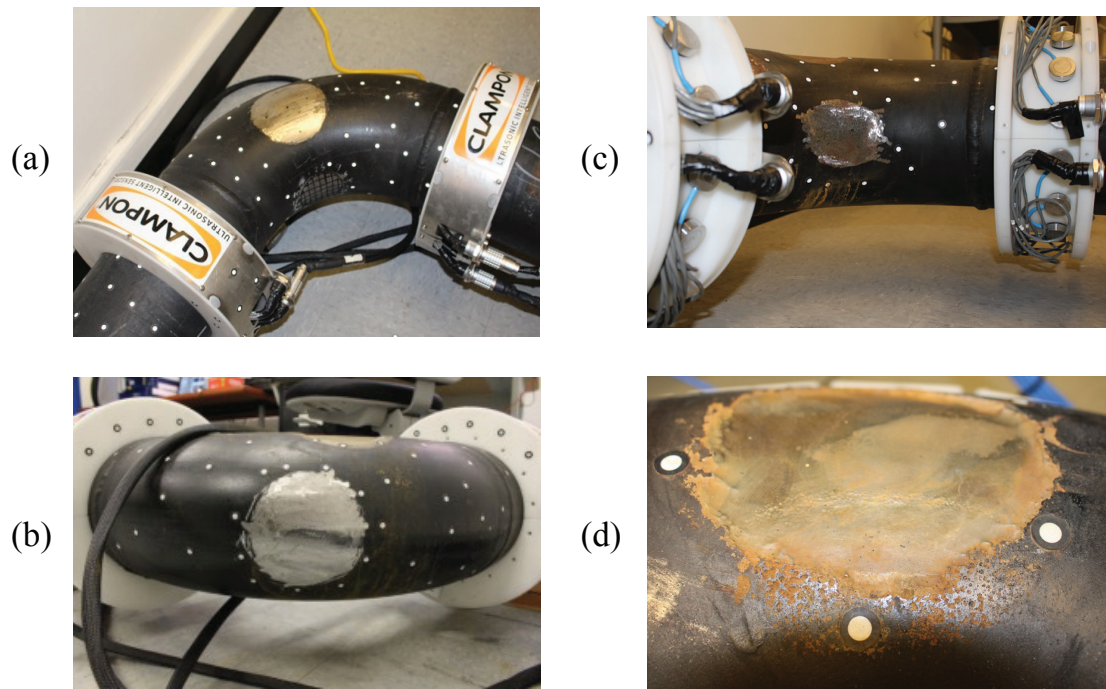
Photographs of the three defects considered in the experimental study. (a) Overview of pipe orientation and Defects I and II (b); Defect III, introduced via angle grinder, located on the extrados; (c) Defect I, introduced via angle grinder on the intrados; (d) Defect II, introduced via accelerated corrosion on the elbow side. The white stickers are reference markers used to map the wall-thickness loss with a 3-D laser scanner.
